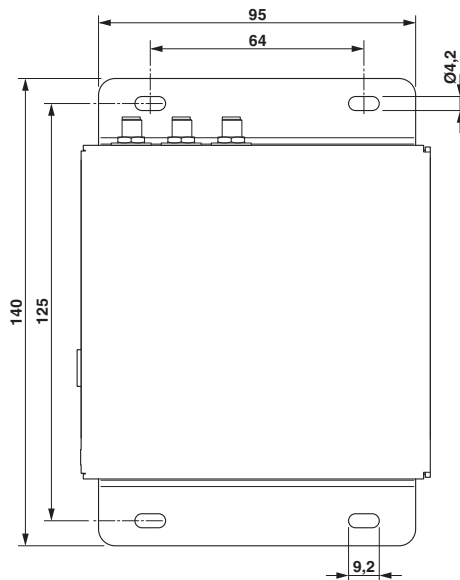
Dimensions of the mounting kit and drill hole template in mm
